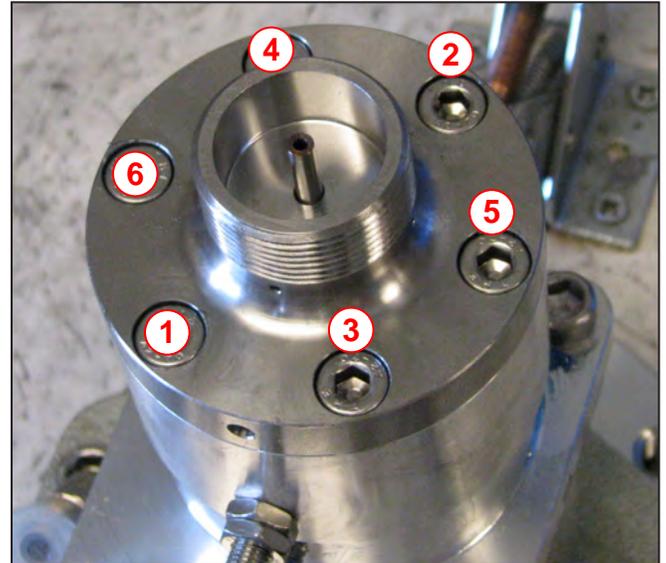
Apply anti-seize to the thrust housing bolts and tighten them in a crisscross pattern to snug using a 6 mm Allen wrench.
